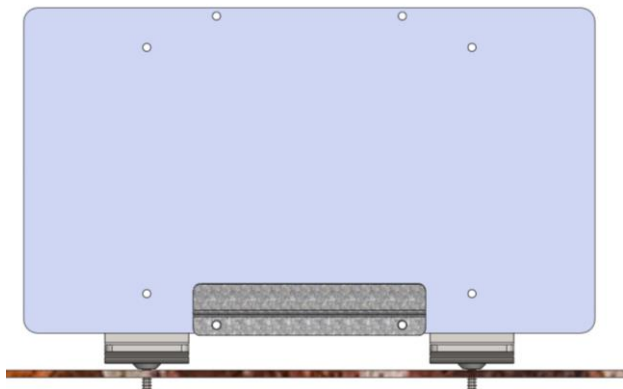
Base Plate with Inner Foot Bracket – RH or LH Mount
